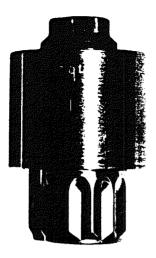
(left). - View of square test bushing with with bolt engaged in ZipNut. Twenty nuts were each installed at 1200 in-1b for ten cycles.
